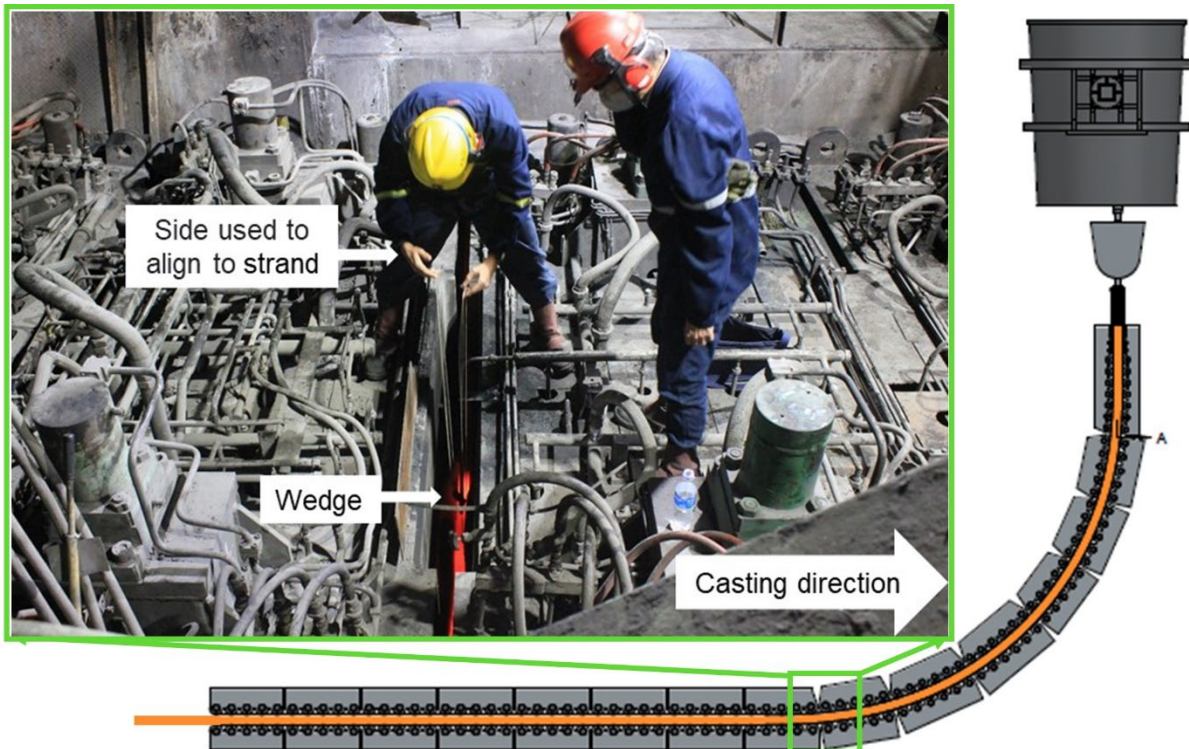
Photograph and details of the wedge insertion at the continuous casting machine.
